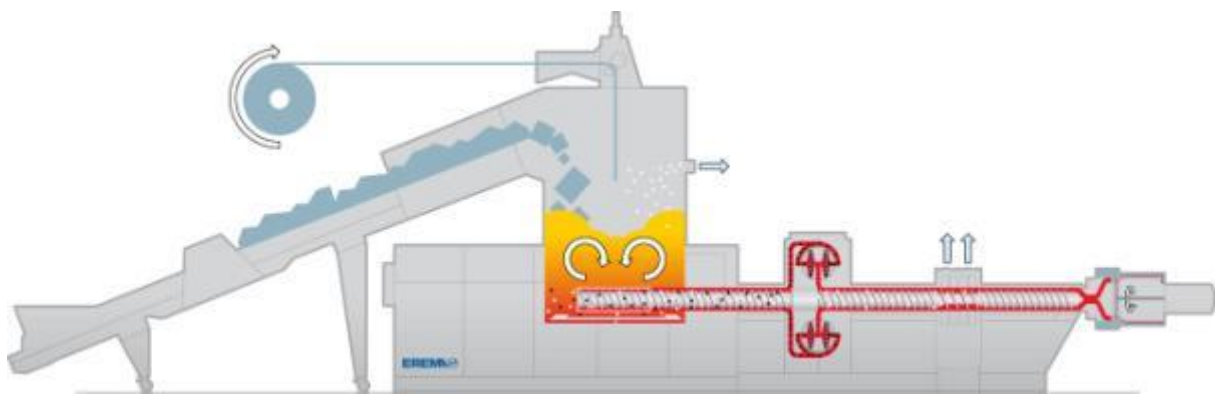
EREMA 1108TVEplus (extruder screw d: 80 mm, cutter compactor d 1100 mm)
